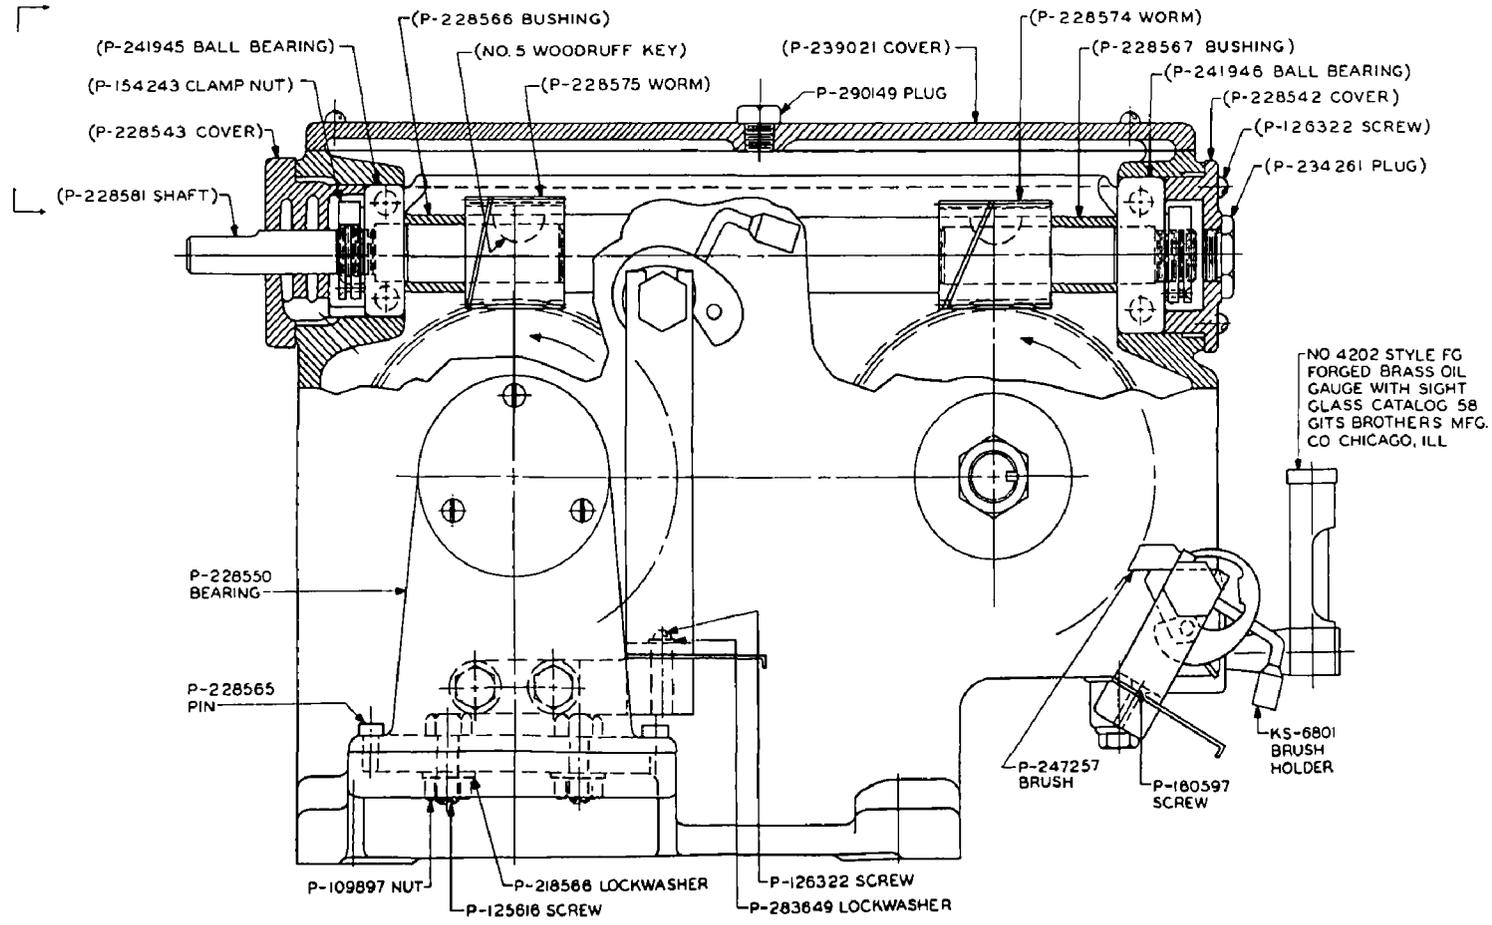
2A and 2B Interrupter Mounting—Side View (For Top View See Fig. 7 and 8)
